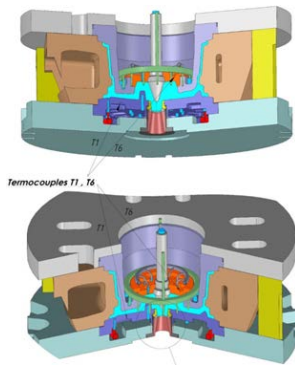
Mold for low pressure casting of care wheels with control sensors – thermocouples T1 and T6.
